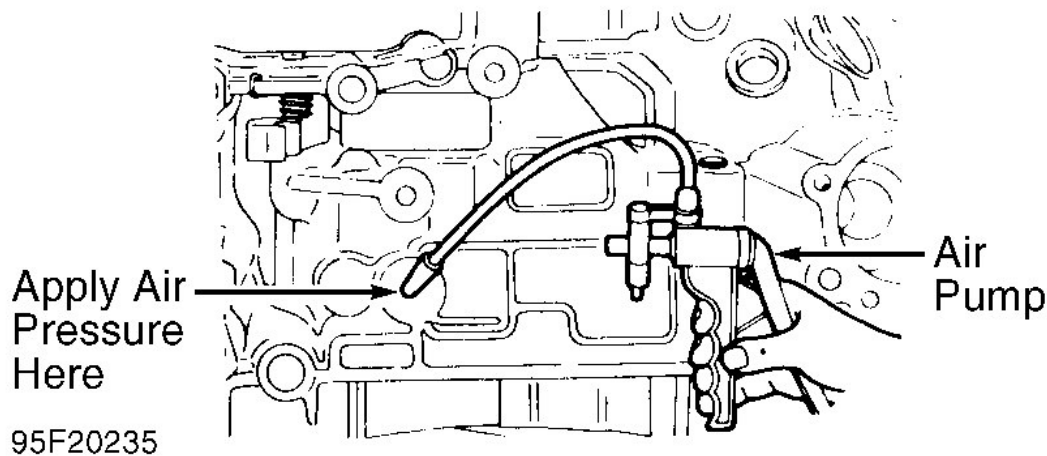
Applying Air Pressure To Check Low-Reverse Brake Clearance
